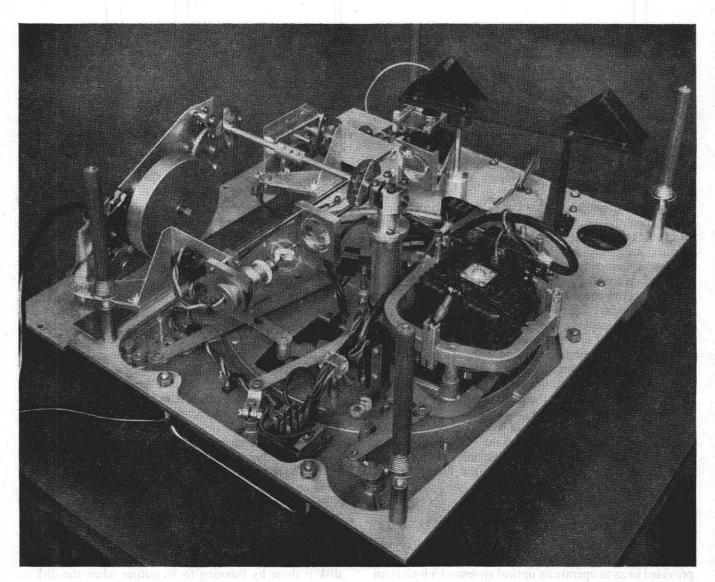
Underside of the Turntable Unit showing lifting cam operating mechanism and pick-up position indicator
